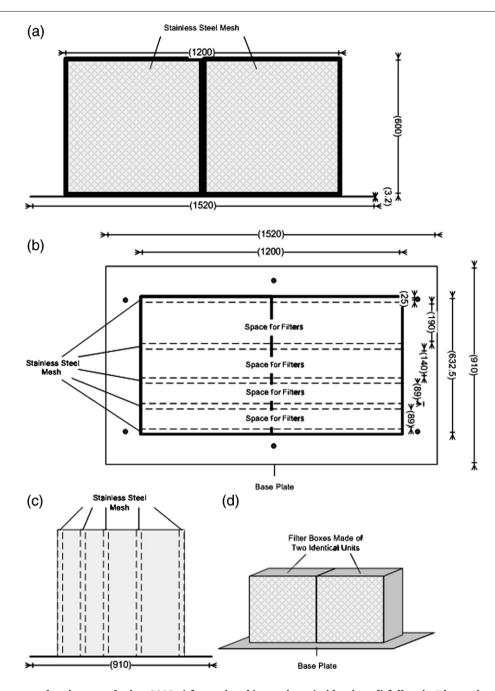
a-d. Prototype barrier gate design 2003 a) front view b) top view c) side view d) full unit. Dimensions given in mm.
